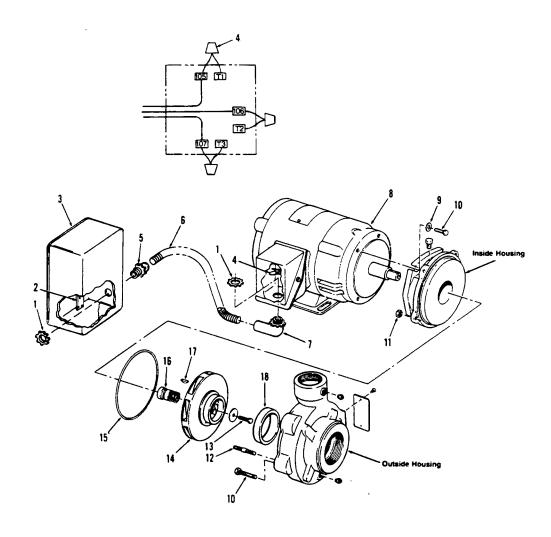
MOTOR AND STARTER ASSEMBLY.
